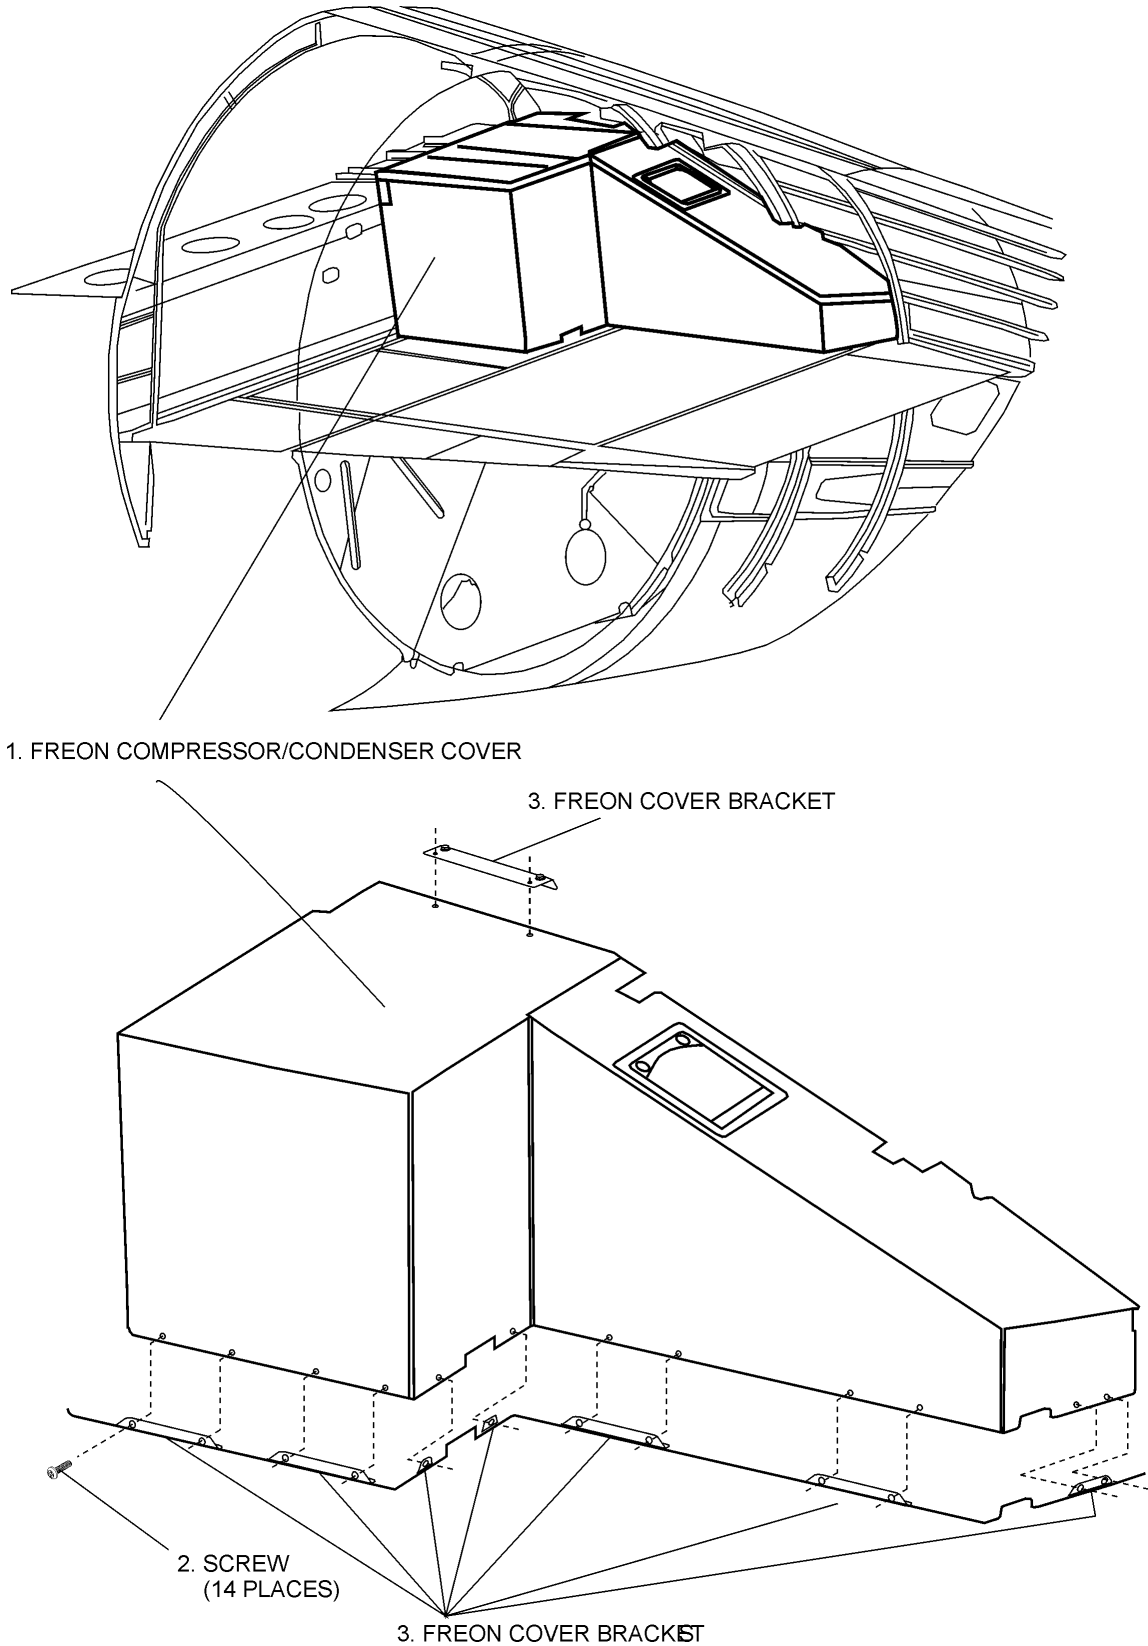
Compressor/Condenser - Removal/Installation (Sheet 1 of 6)
